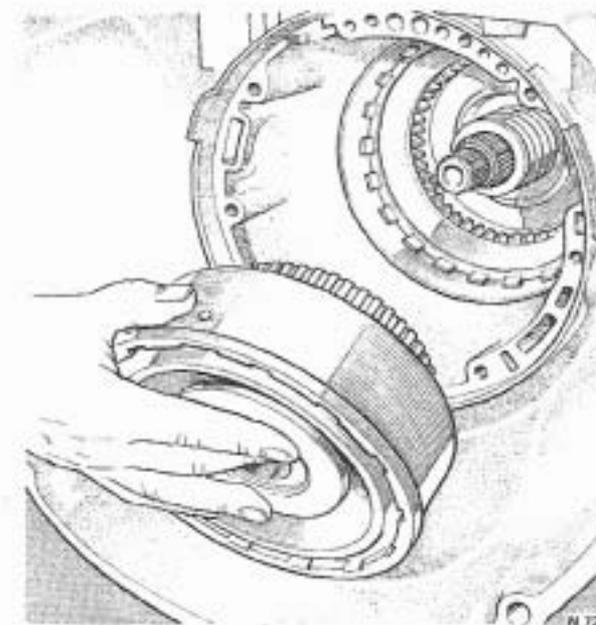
REMOVING THE DIRECT CLUTCH AND INTERMEDIATE SPRAG ASSEMBLY
